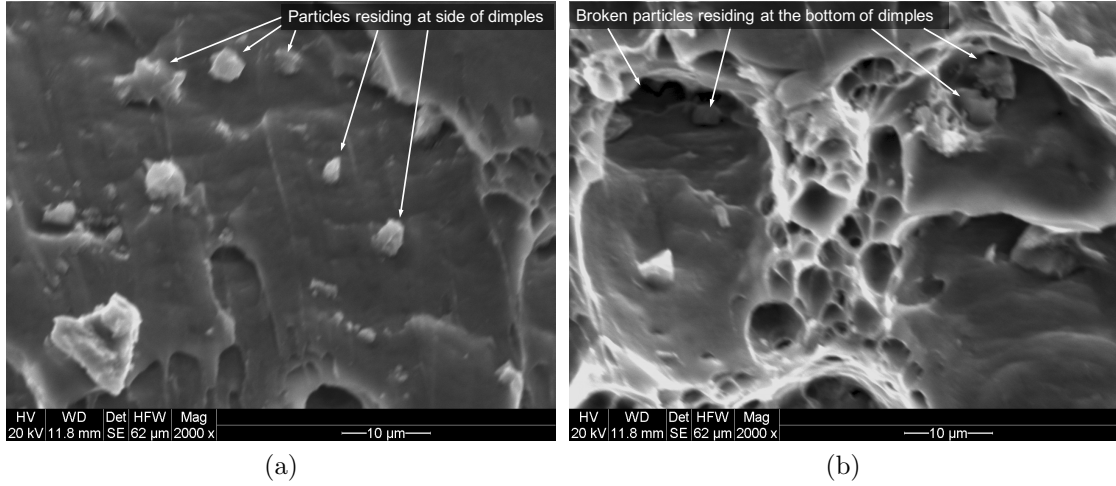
Fracture surface of EHFF specimens deformed at 19.4kJ showing different dimple sizes and cracked second phase particles at 2000× magnification; (a) at side of dimples and (b) at the bottom of dimples.
